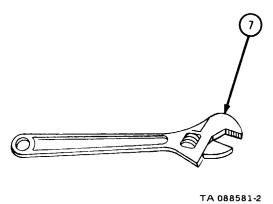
Tools and Equipment Used on All Trucks (Sheet 2 of 2)
